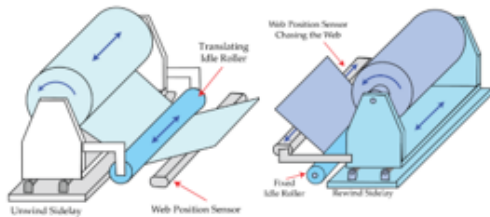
A web guide at unwinding and rewinding side (R2R technologies)
